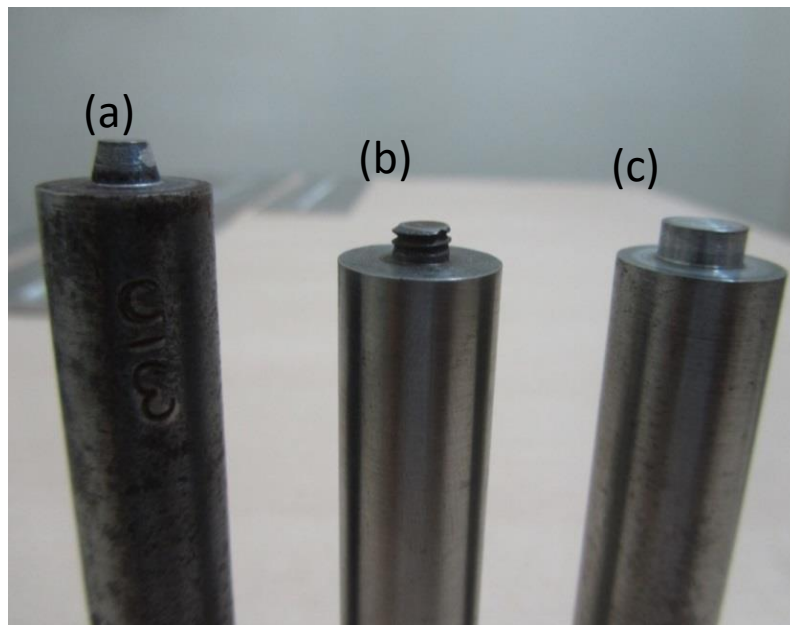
Tool profiles used for FSW welds (a) tapered (b) threaded (c) Cylindrical.
